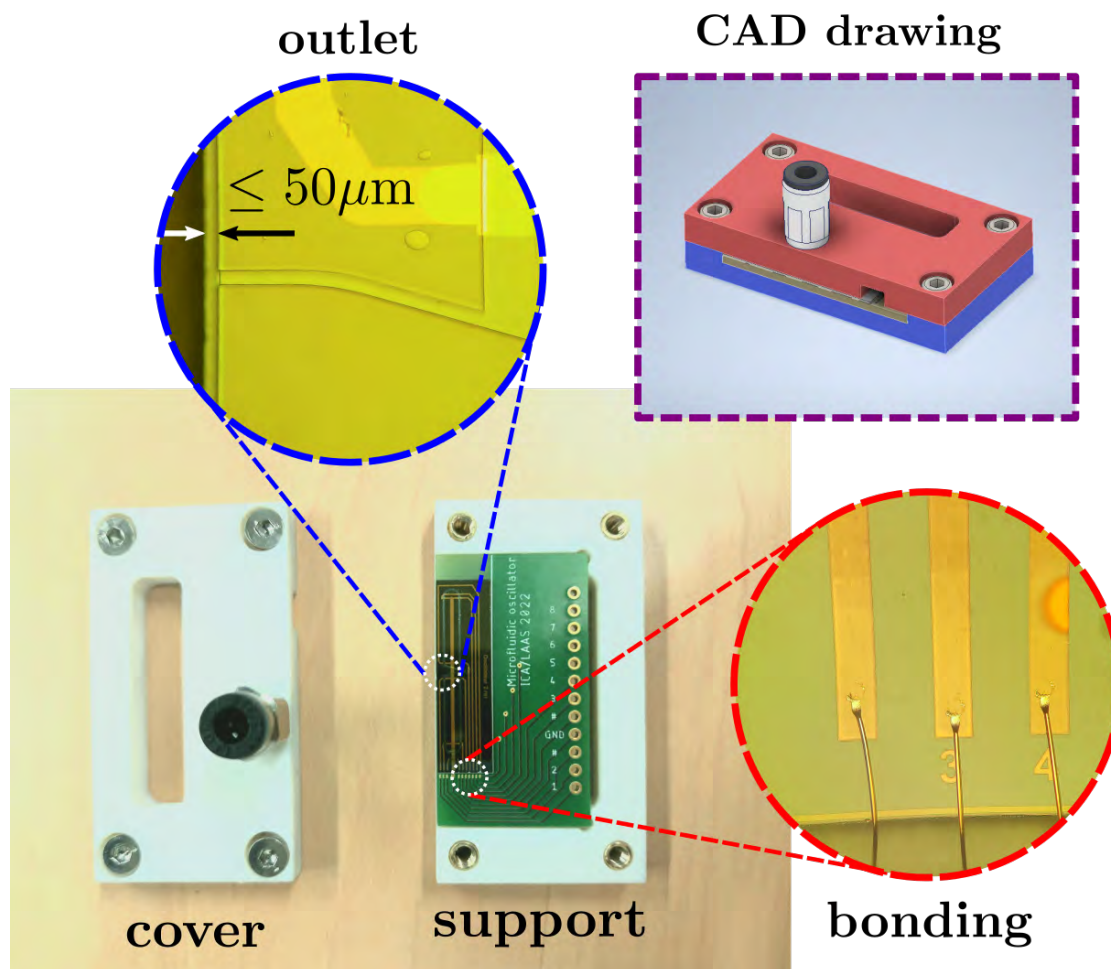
Chip/PCB/casing assembly with details of the chip-to-PCB bonding wires (red) and of the diced edge of the wafer in front of the micro-oscillator's exit (blue).
